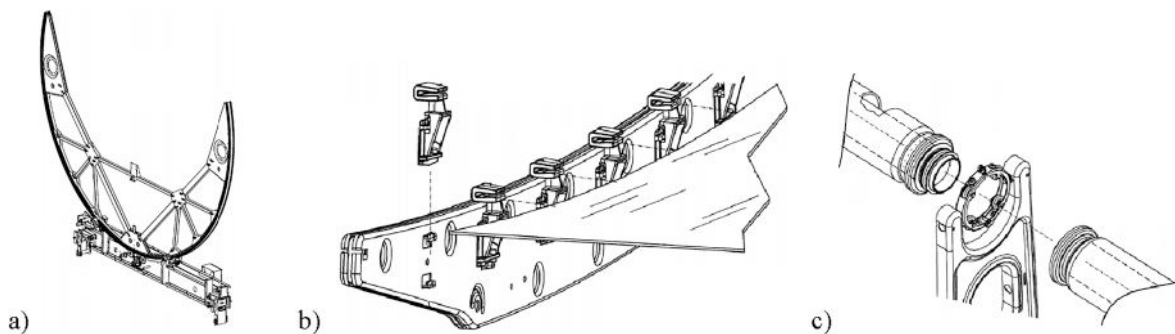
a) Circular frame mounted on the support and drive bases, b) clamping method concept for mirror support and alignment, c) Illustration of the receiver tubes bearings at the HCE proposing a direct flange (Brenmiller et al., 2016).
